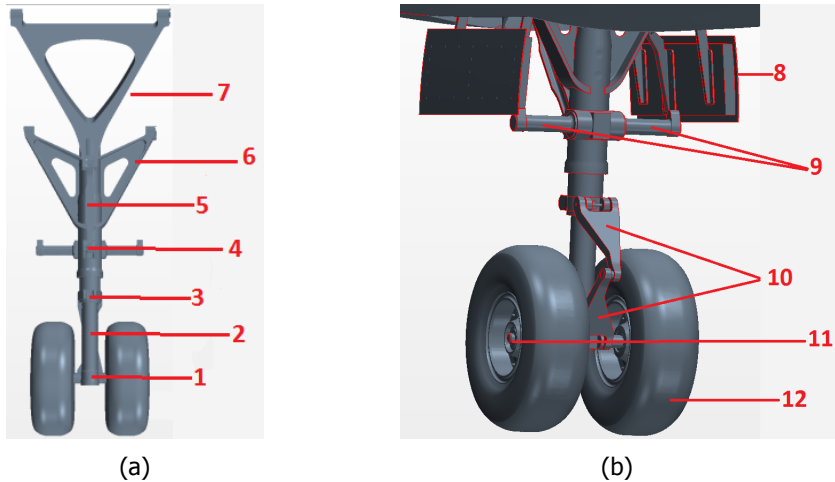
(a) View of the bare ALLEGRA NLG assembly; (b) View of the back of the NLG assembly with bay doors and fuselage. Extracted from [21].
